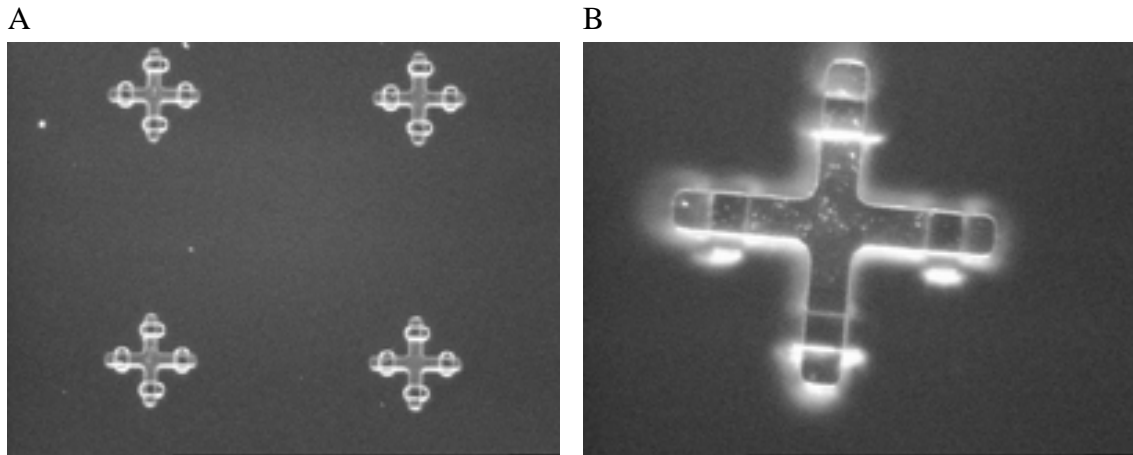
(A) Top view of multiple parts. (B) Top view of single part.
